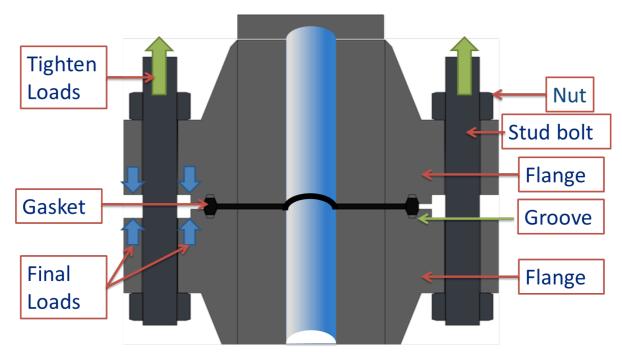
Outline of a flanged joint, its elements, and sealing process.
